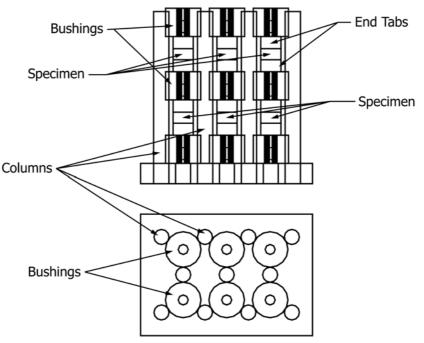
Drawing of Alignment and Bonding Fixture (showing 12 specimens)
